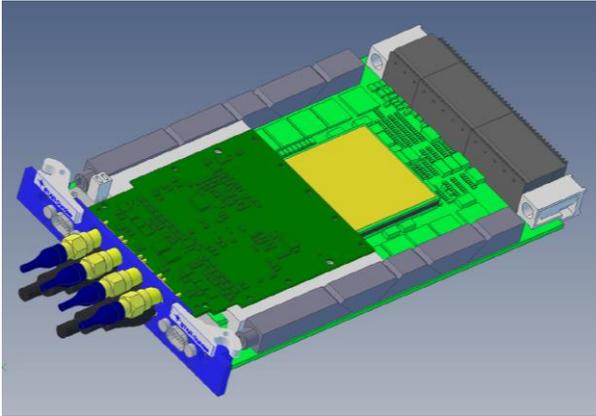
SpaceVPX-RTG4 Board CAD Model with FMC Card Fitted
